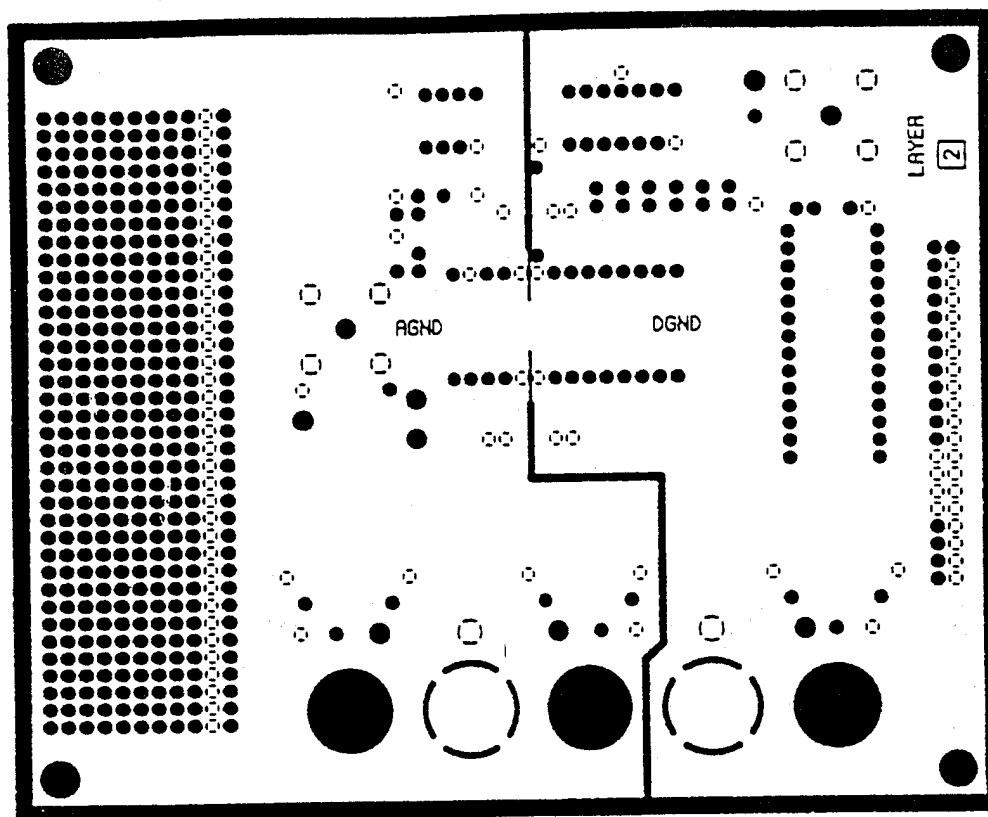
Ground Layer PCB Layout (Not Shown to Scale)
